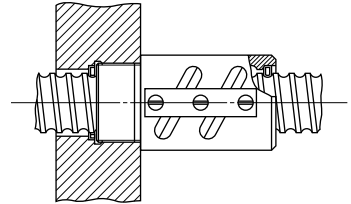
Installation of brush-seal to a ball nut with thread screw
